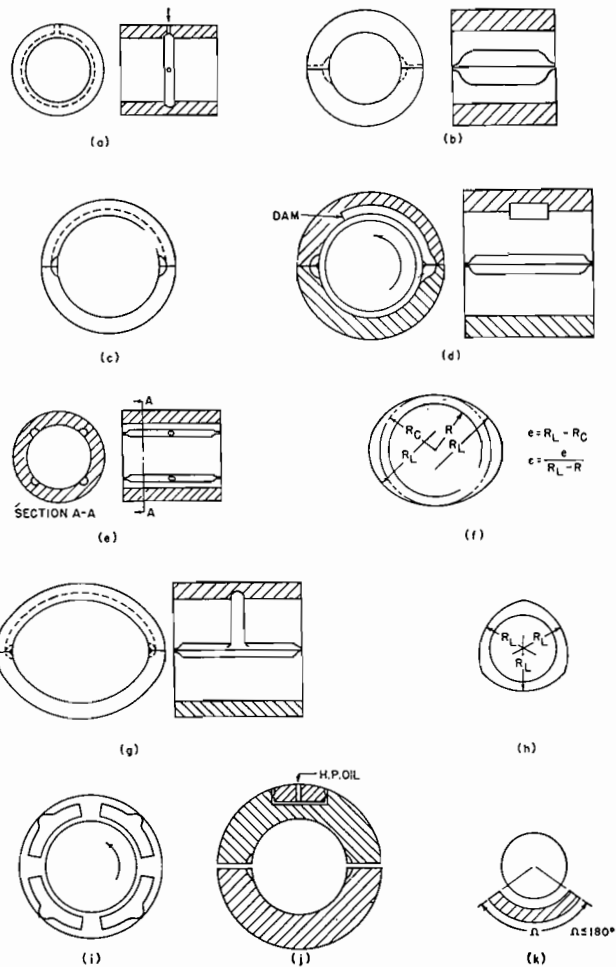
Sketches Showing Shapes of Several Types of Pressure-fed Bearings; (a) Circumferential-Groove, (b) Cylindrical, (c) Cylindrical Overshot, (d) Pressure, (e) Multiple-Groove, (f) Elliptical, (g) Elliptical Overshot, (h) Three-Lobe, (i) Pivoted-Shoe, (j) Nutcracker, (k) Partial (from reference 8 — Courtesy McGraw Hill Book Co.).
